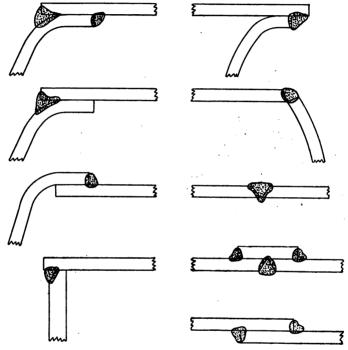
Methods of Making Welded Seams in Tanks Courtesy of C. & C. Electric and Manufacturing Company
